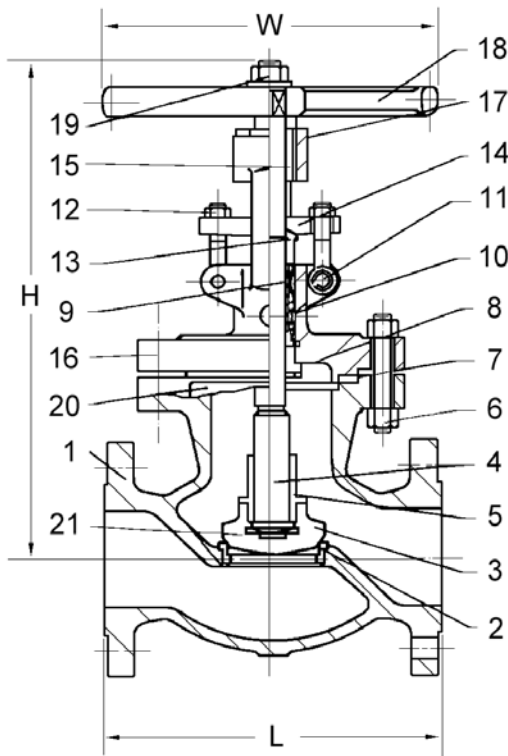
CS-600 Class 600, Flanged ends, bolted bonnet, WCB body & bonnet, 13Cr/HF trim.
